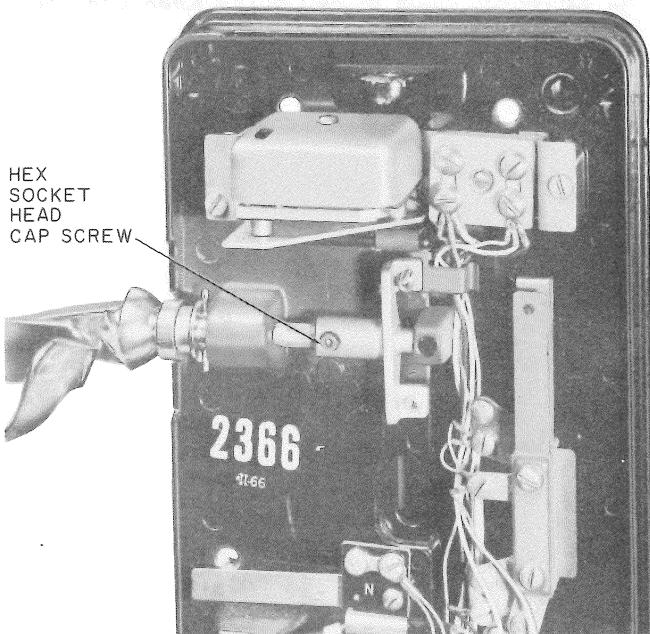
Method of Securing Adapter to Switchhook Assembly
